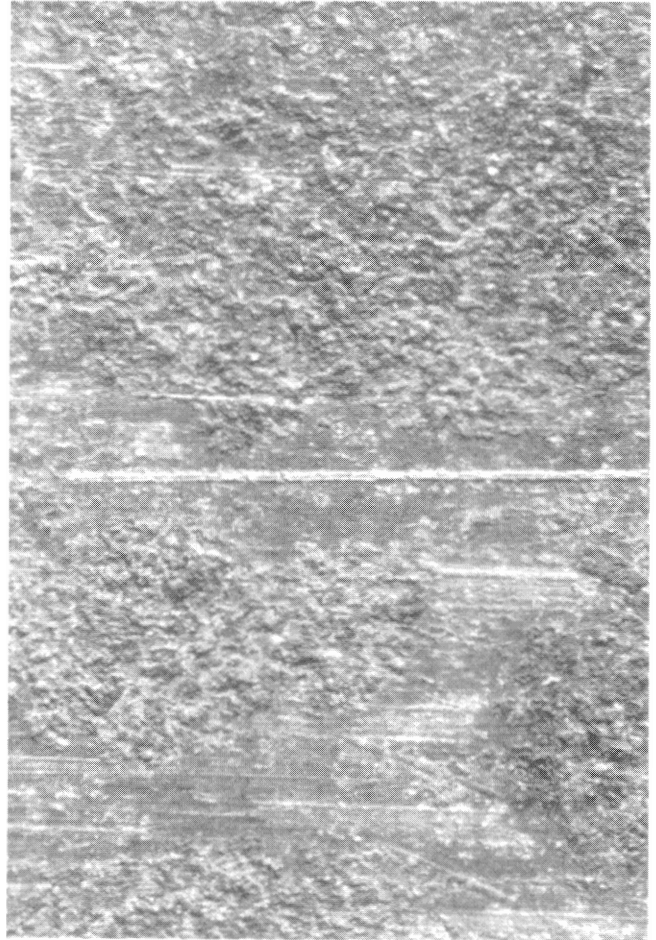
Corroded 5.0 in (127 mm) Lead Babbitt Journal Bearing, 15× Magnification of Bearing Surface.
